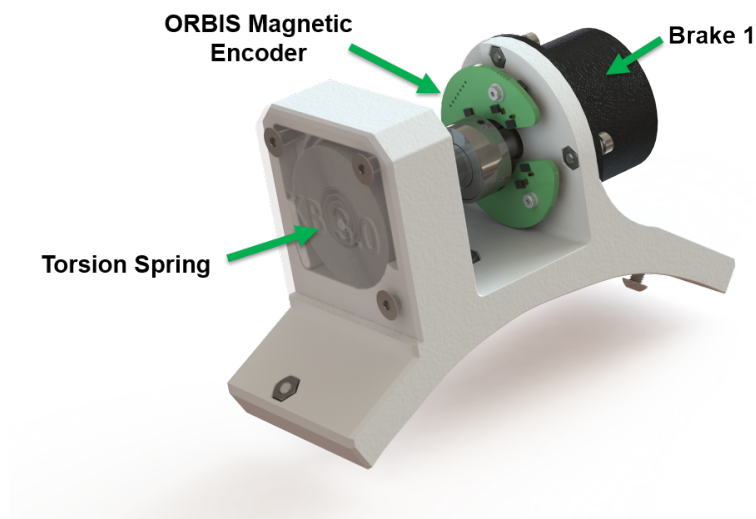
Torsion spring and ORBIS magnetic encoder assembly.
